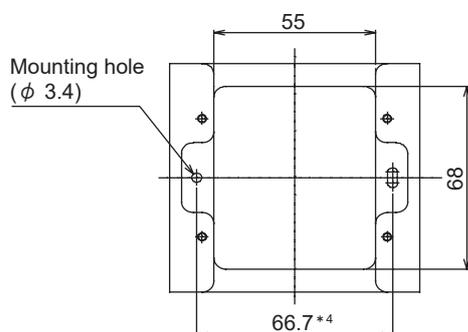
Surface of the Multi-thermocase mounting kit (mm)
